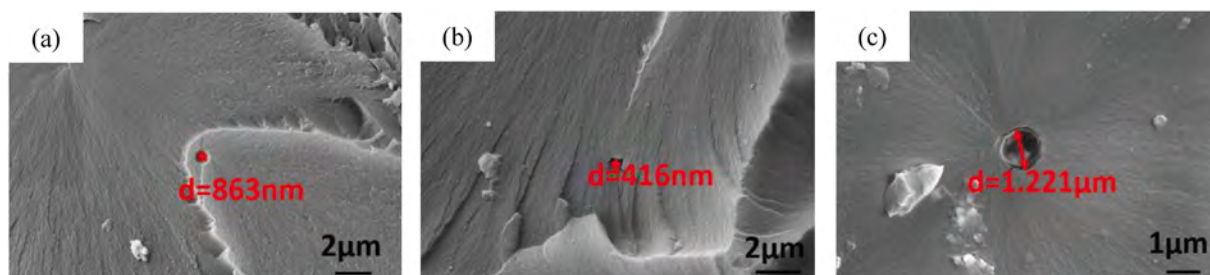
SEM images of tensile fractured surfaces, a bubble in (a) X-0.02 sample, (b) X-0.05 sample and (c) direct casting sample [18].
